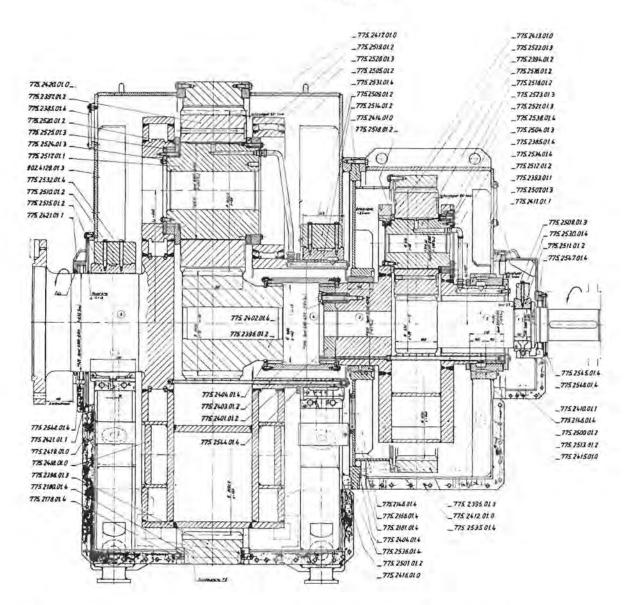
Type CPU-30S heavy duty planetary gearbox. 3200 kW, 500/16.2 rpm.
